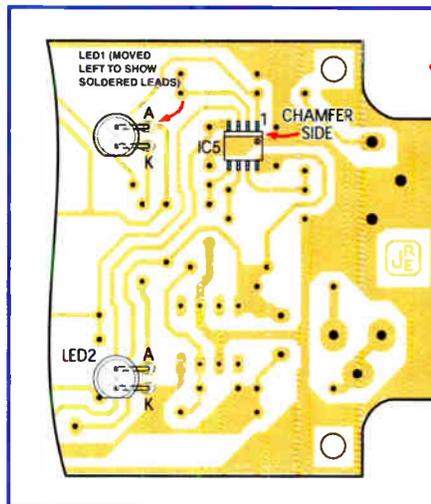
(left): use fine-gauge solder and a fine-tipped soldering iron to install the SOIC device (IC5) on the underside of the PC board.
